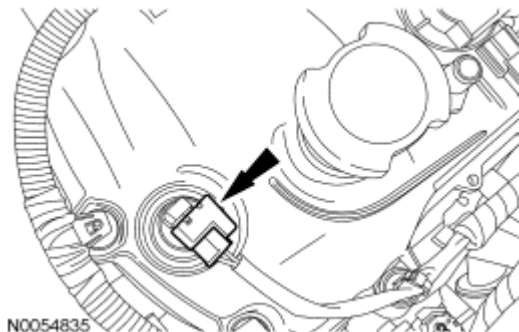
Locating LH VCT Solenoid Electrical Connector
